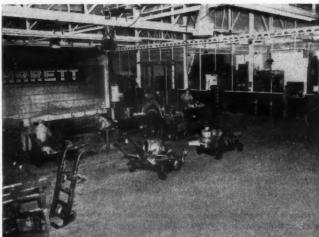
General view of overhaul section shows wheel carts used for handling miscellaneous parts taken from trucks
